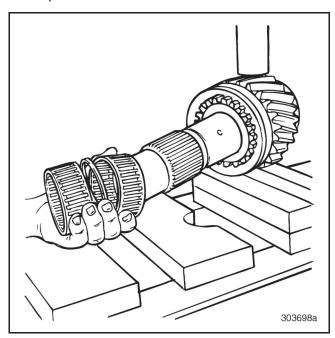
Installing Lo-Range Gear Bearings and Spacer
